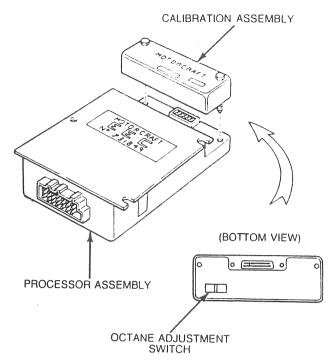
ECA component parts. (Courtesy of Ford Motor Co.)
